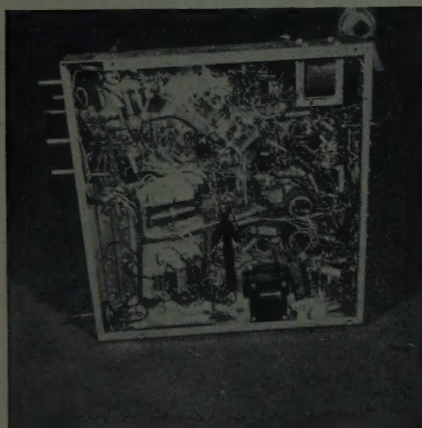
(b)—Production changes resulted in tube shown in Fig. 1(a) to be relocated on bottom side of chassis.
